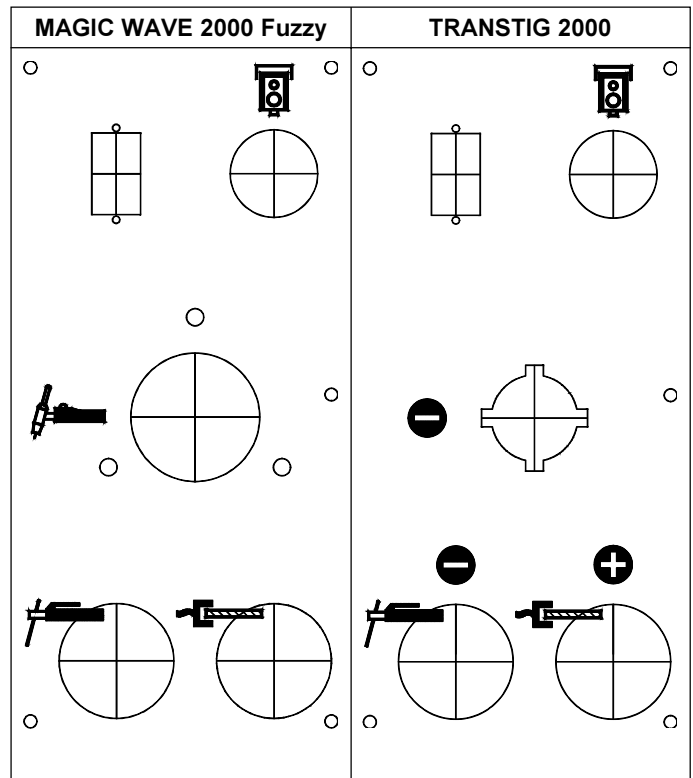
Torch / welding-cable connection points on front of machine
